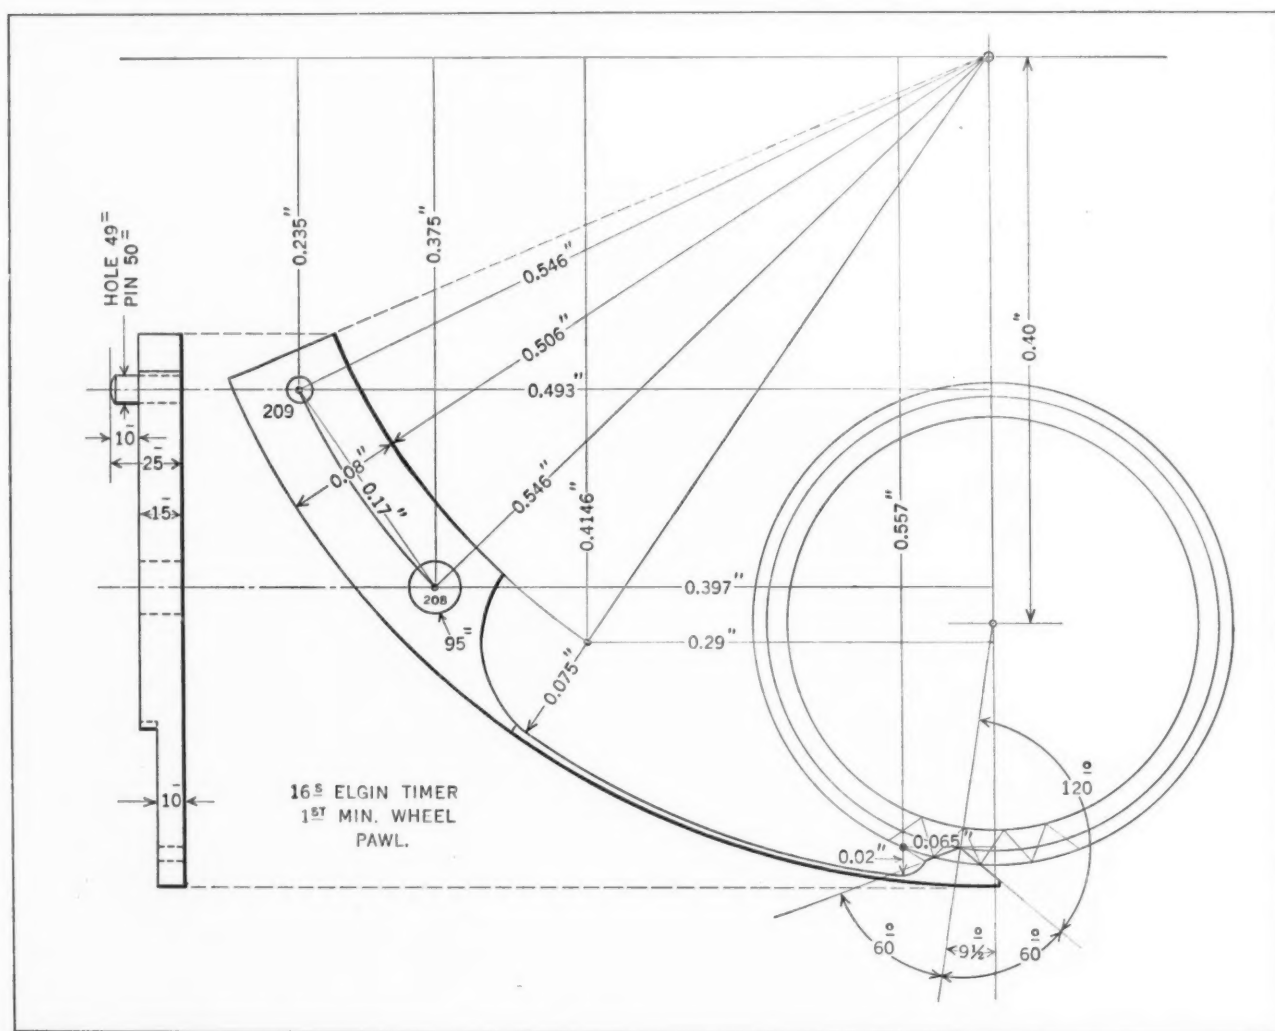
Detailed Drawing of Watch Pawl, Dimensioned by Step Method from Correlative Outside Lines
